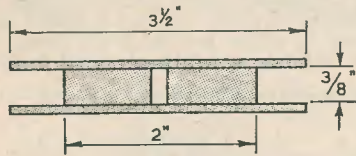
DIMENSIONED CROSS SECTION OF THE COIL FORMER G40
